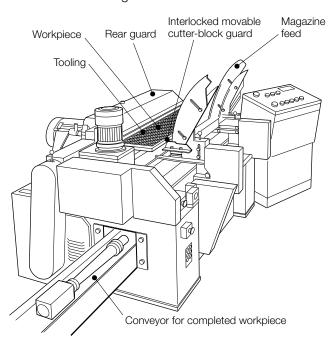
Automatic rotary knife lathe with interlocked movable cutter-block guard and guard locking
